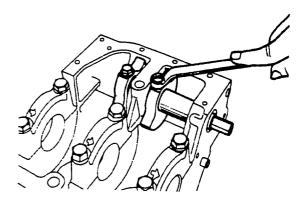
MEASURING THE BALANCER SHAFT END PLAY
